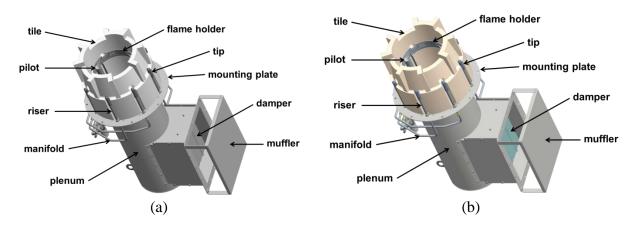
3D drawings of a process burner: (a) black-and-white and (b) color.
